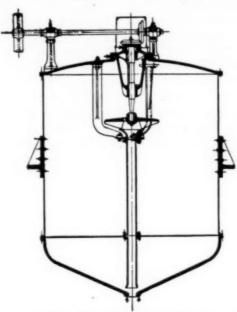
TURBINE IMPELLER AGITATOR AT TOP
